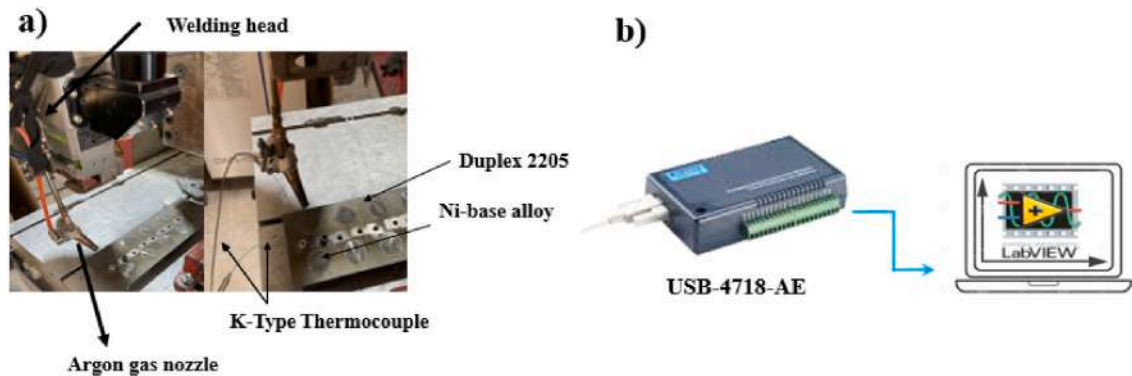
Laser instruments of welding process, a) actual view, b) schematic.
